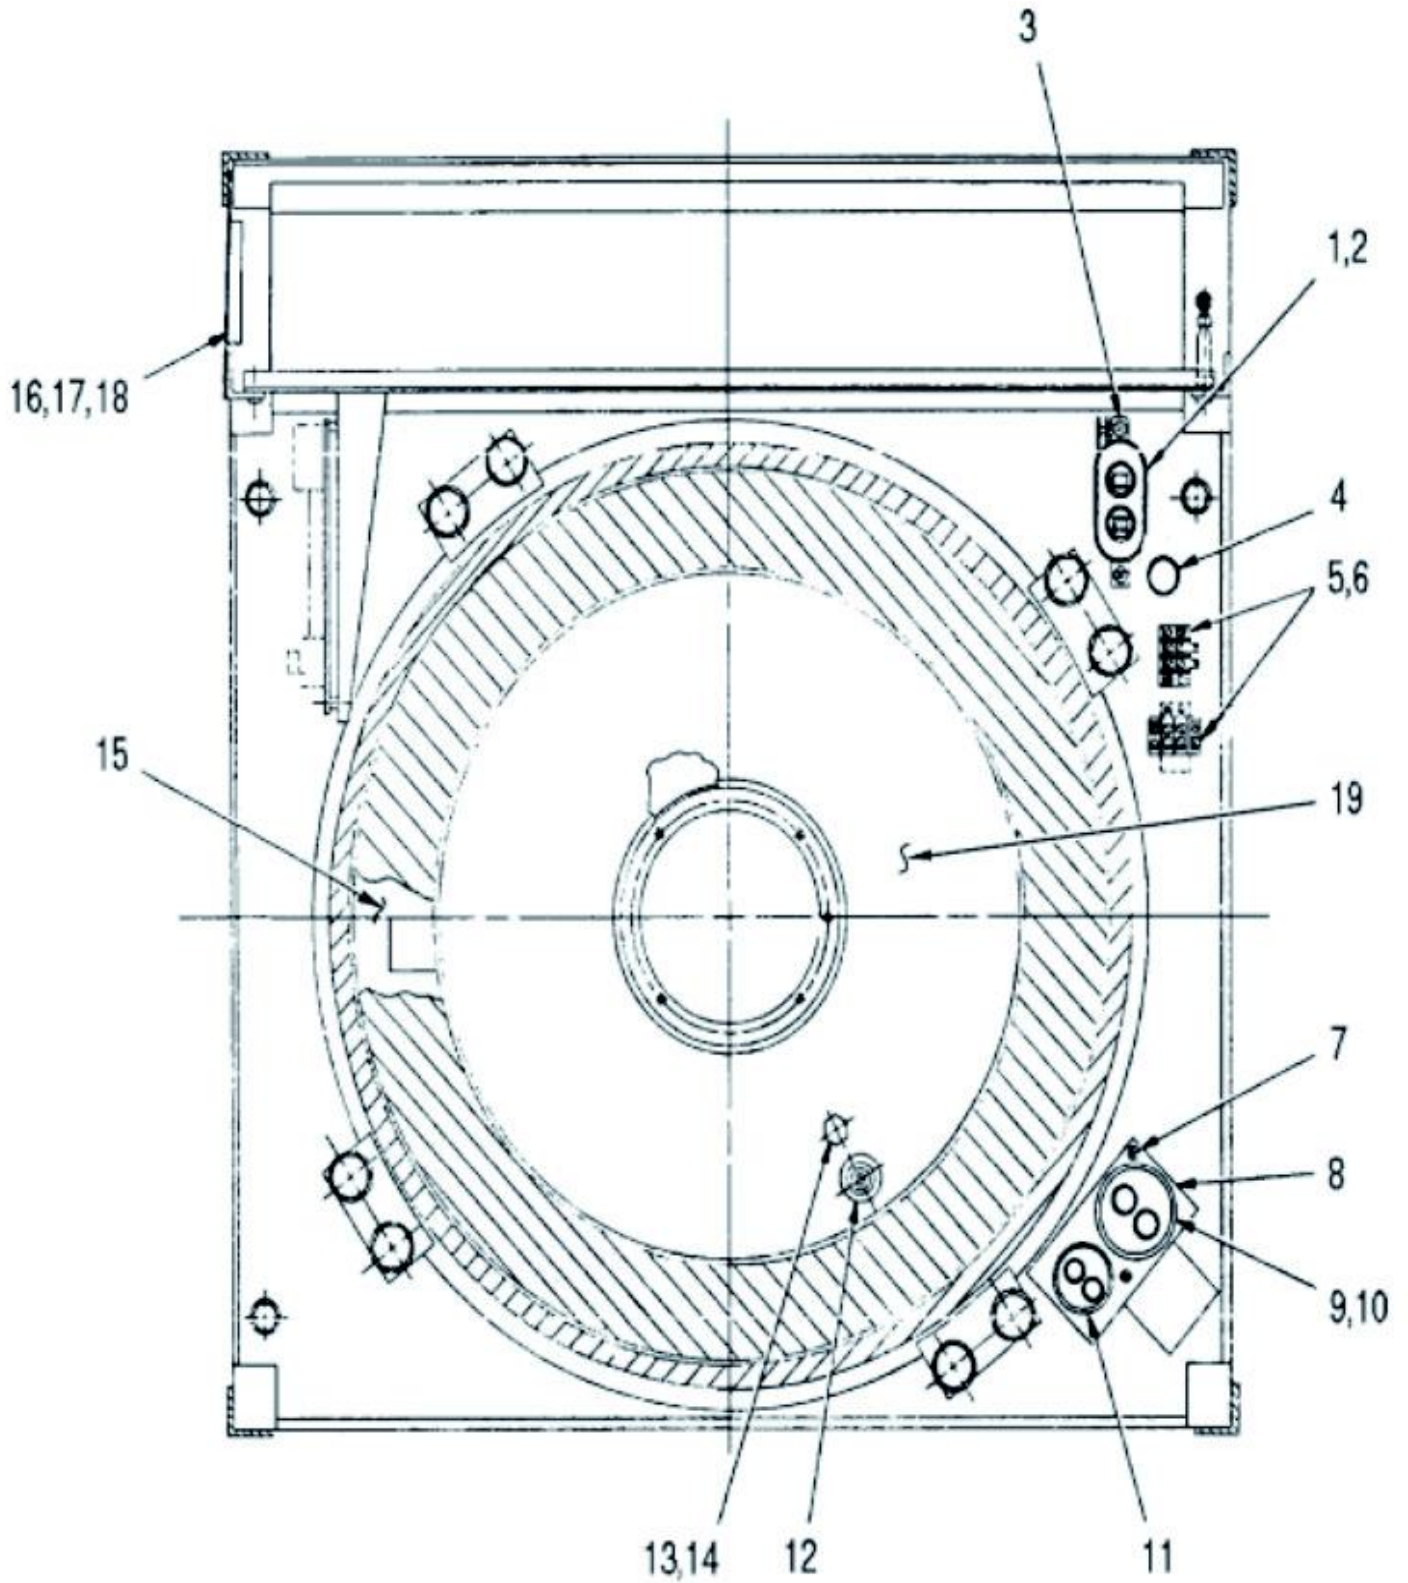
RC5C PLUS Evaporator Assembly (Top View)
